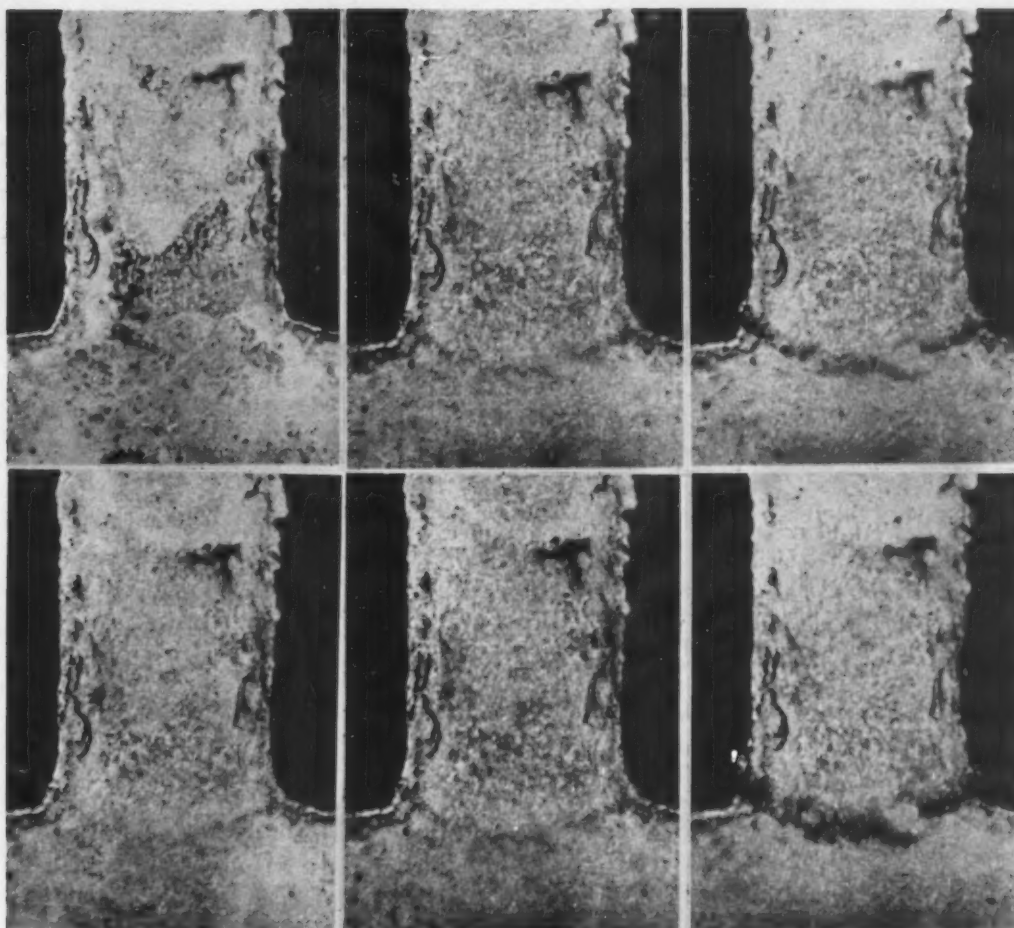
Series of enlarged photographs showing initiation (at 1120 F), and subsequent propagation, of hot tears in critical area of a test casting of aluminum-1.0 per cent tin. *Left* — top — 1243 F, bottom — 1120 F; *center* — top — 1053 F, bottom — 1025 F; *right* — top — 897 F, bottom — 560 F.
